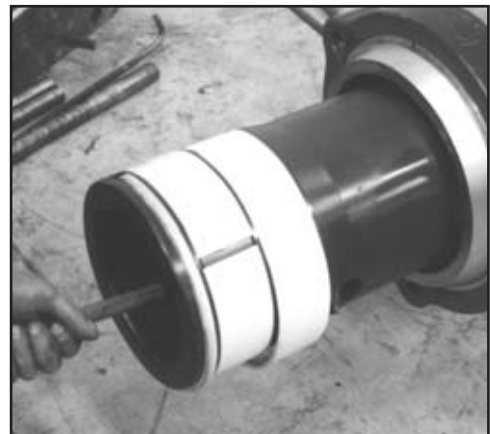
REMOVE PISTON WITH PISTON HOOK
